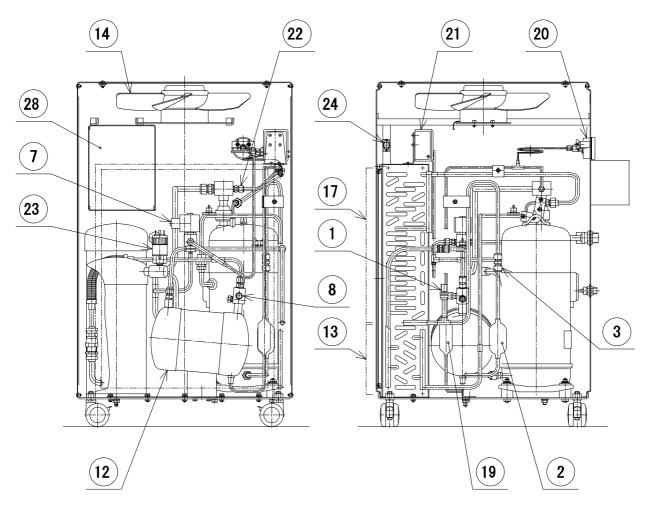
COMPONENTS OF CSA-71A COMPRESSOR UNIT
